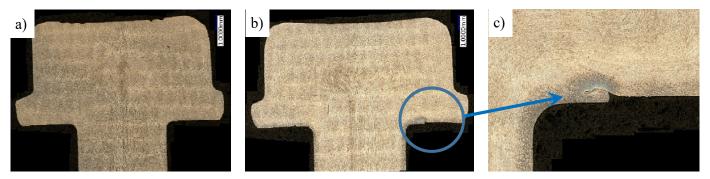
Samples of polished longitudinal sections of DIN 6921 M6x20 bolts after the forging process with the grain flow pattern. a) variant compatible with the technology used, b) variant with a deliberate defect of lap forging the bearing surface, c) the lap forging of the bearing surface
